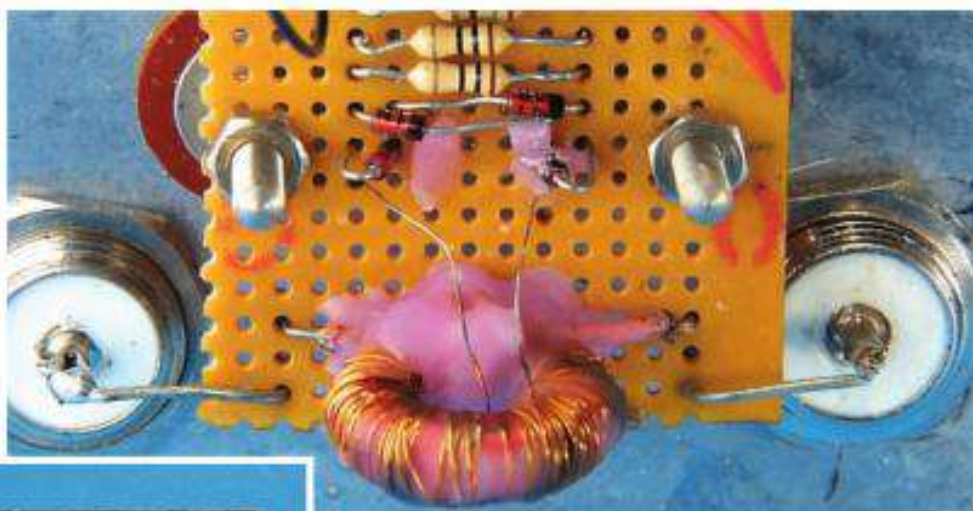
All components are mounted on a small piece of Perf-board mounted between the two coaxial sockets.
